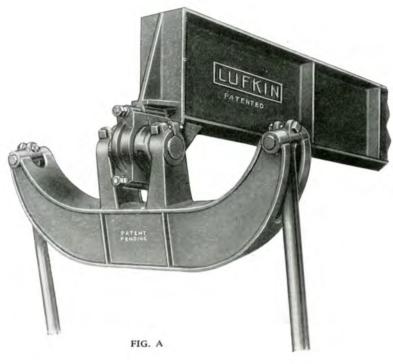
Fig. A. Shows Universal bearing and equalizer construction. The equalizer, made of welded steel, of box type structure, is strong and rigid, with heavy well designed connections to tail bearing shaft and pitmans. Shafts of generous size, turned and ground, are provided for all bearings.
